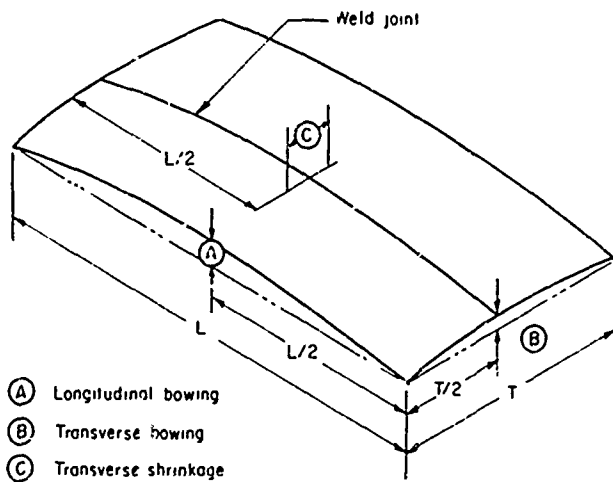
TYPES OF WELD-JOINT DISTORTION
